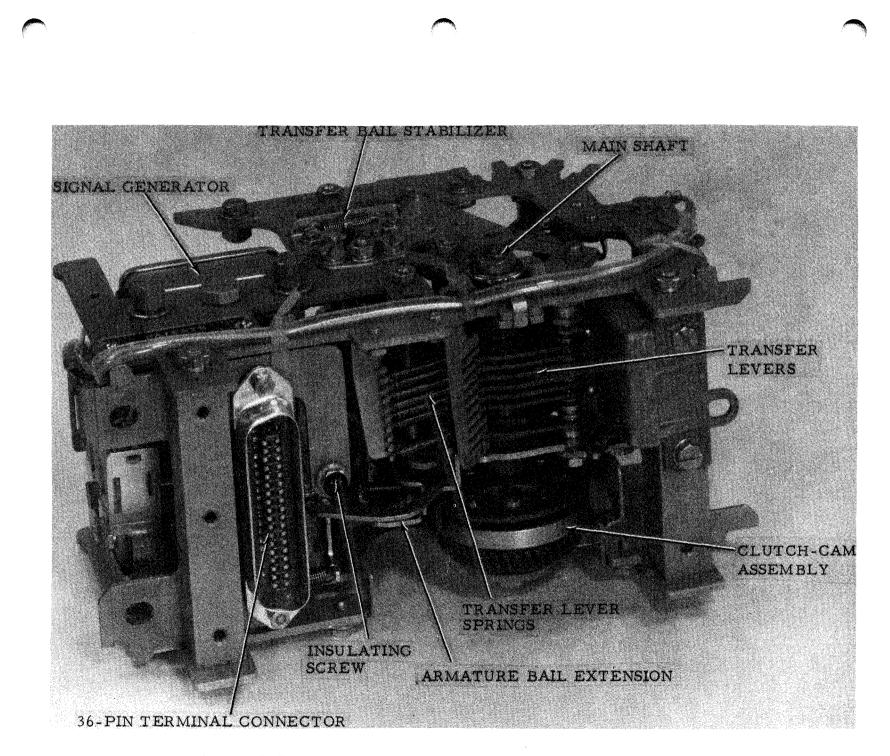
Transmitter Distributor Unit (Cover Plate, Top Plate and Tape Guideplate Removed)
